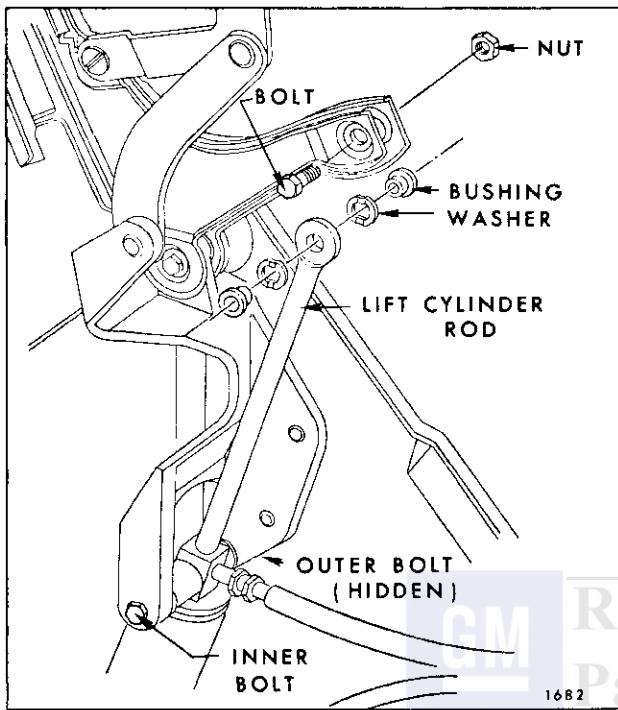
"B and C" Body Hydraulic Lift Cylinder Attachment
